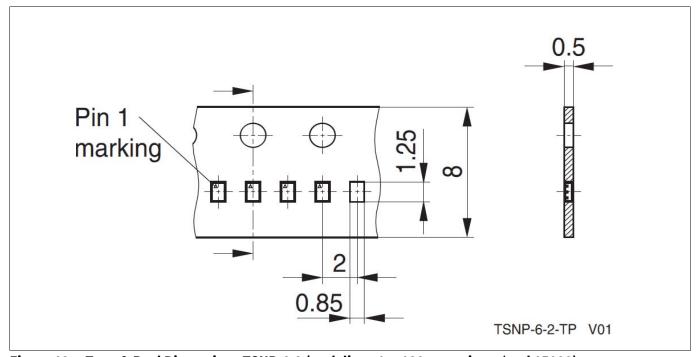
Tape & Reel Dimensions TSNP-6-2 (reel diameter 180 mm, pieces/reel 15000)
